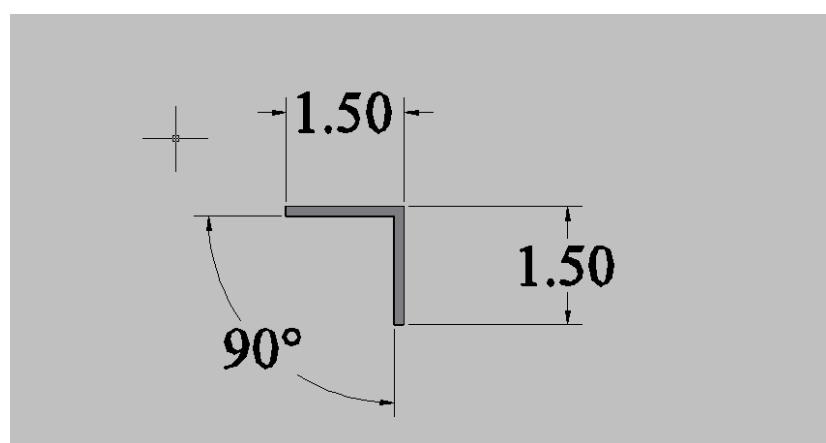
Side View of the Angle Iron (all dimensions are in inches)
